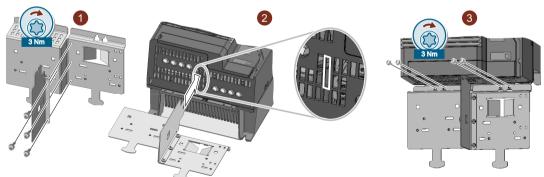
Mounting the shield plates, FSAA ... FSC
